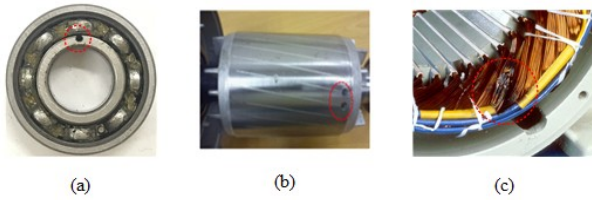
Types of faults a) Bearing damage; (b) Broken rotor bar; (c) Stator winding short-circuit
